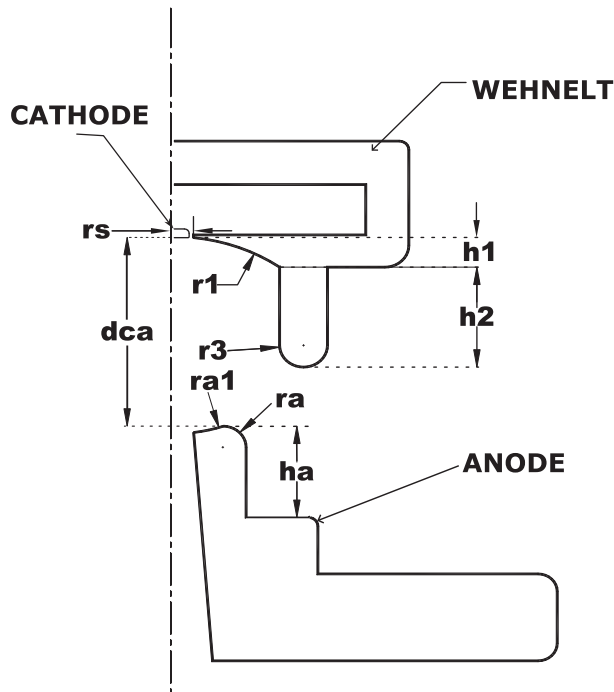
Parameters of the selected EB Welding Gun Geometry.
